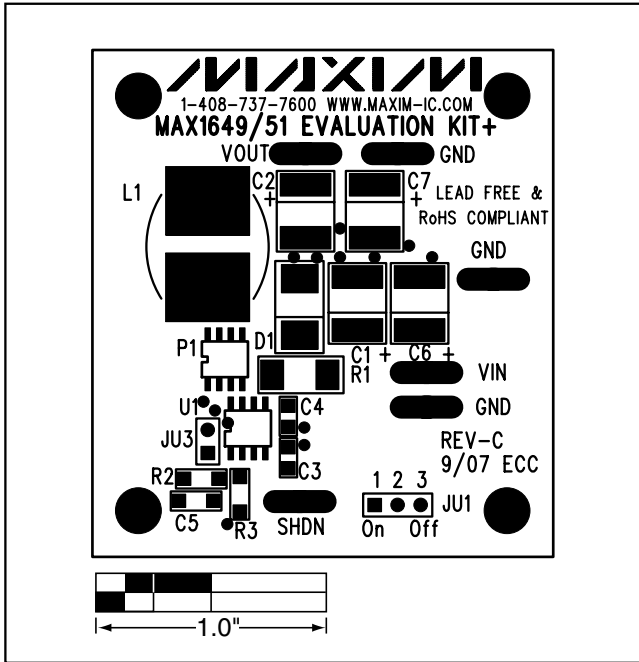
MAX1649 EV Kit Component Placement Guide—Component Side
